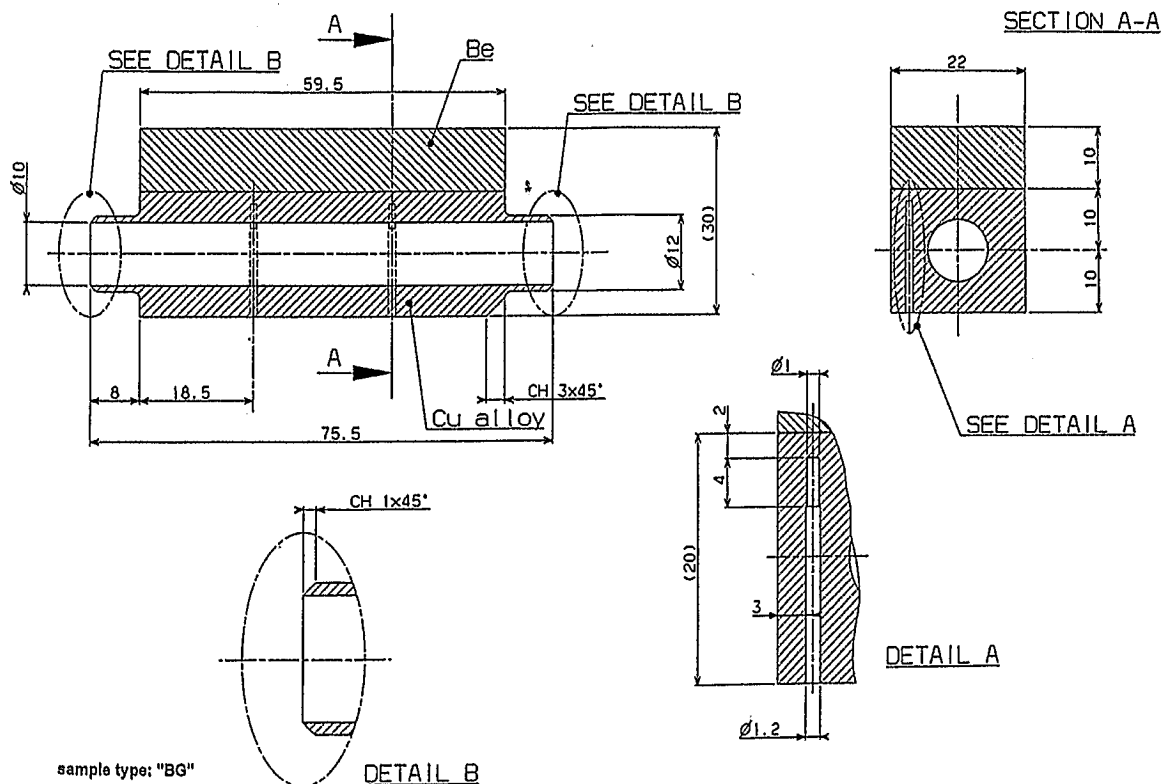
Drawing of PW HIPed Be/Cu mock-ups.
